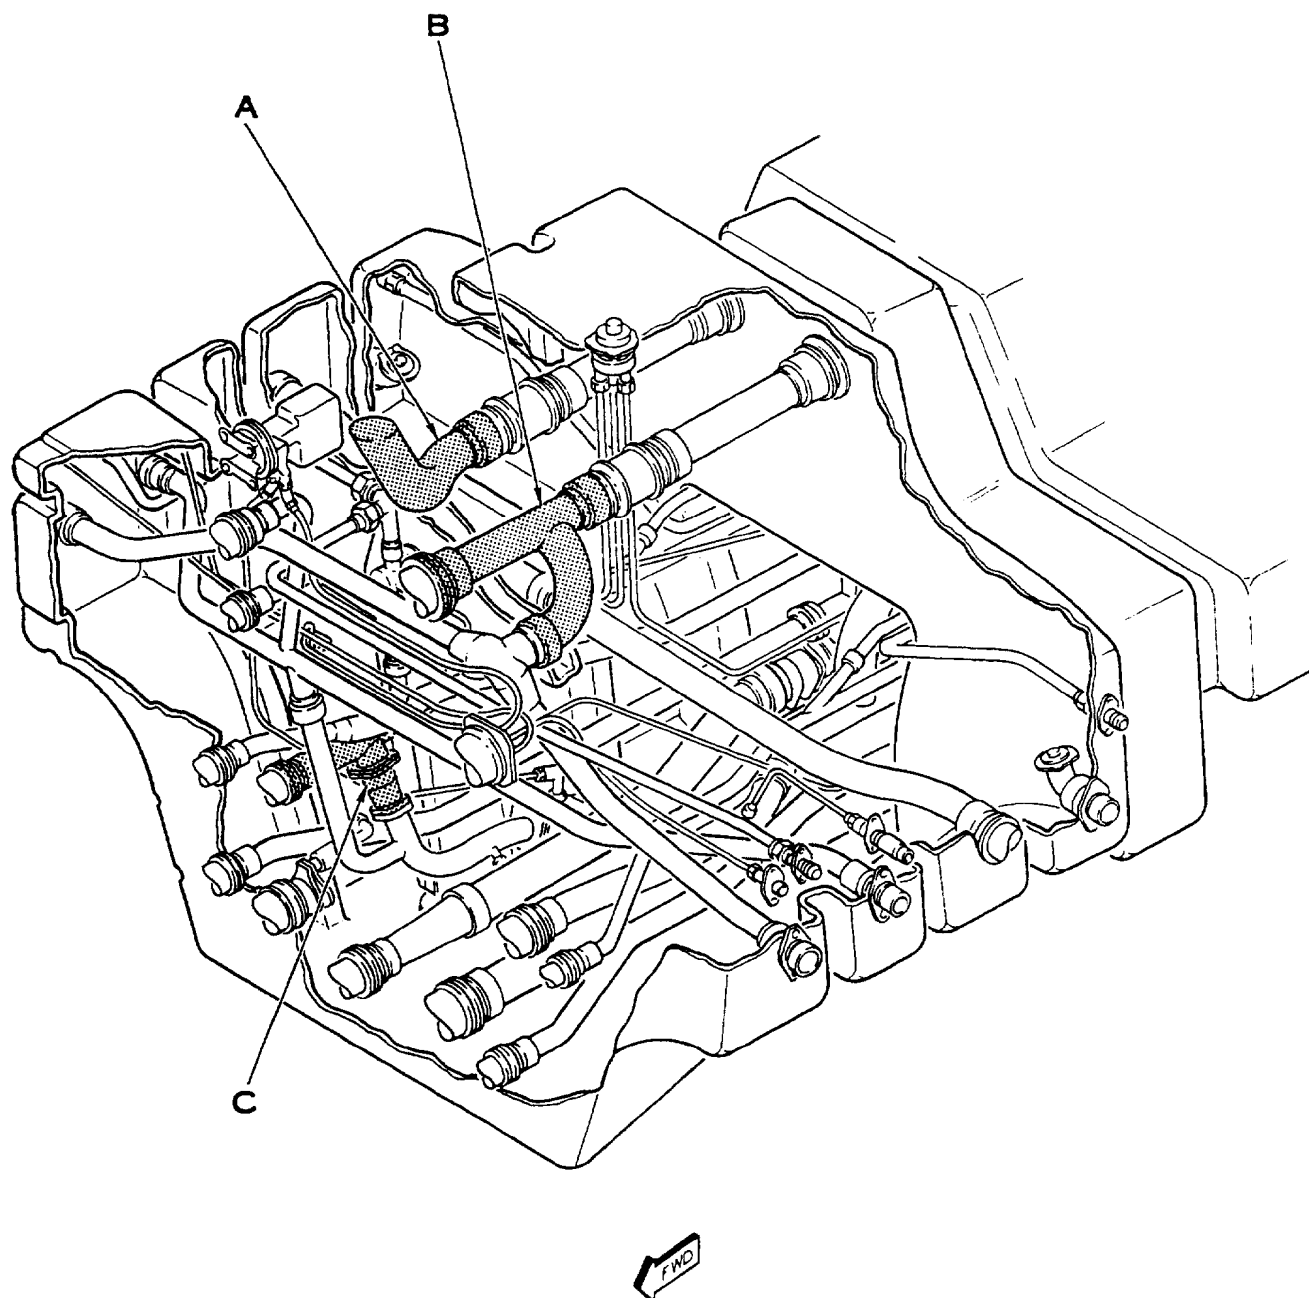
No. 4 Fuel Tank Refuel/Transfer Check Valve (5VAP557) (Sheet 2)
